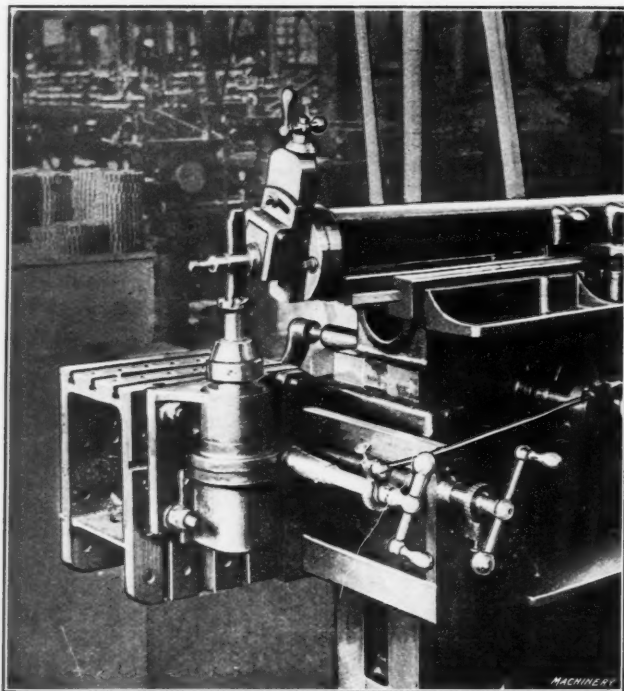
Shaper equipped with Fixture for generating Helical Clutch Teeth
